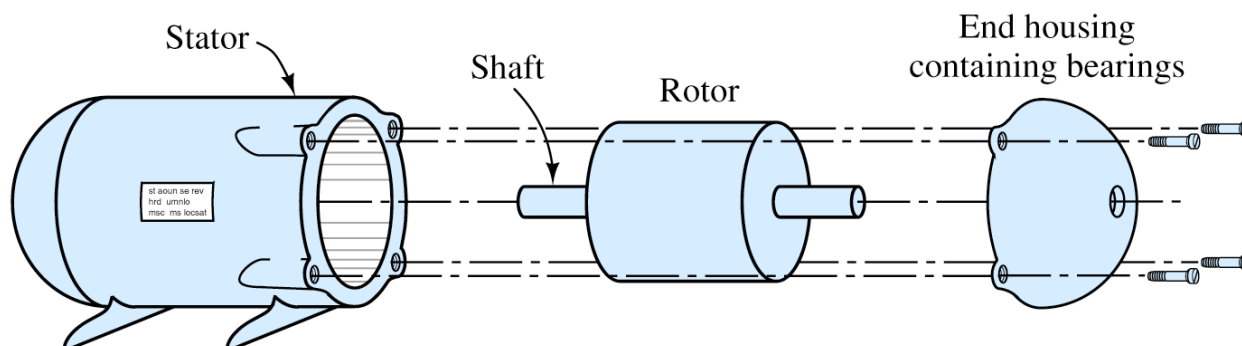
An electrical motor consists of a cylindrical rotor that spins inside a stator.
